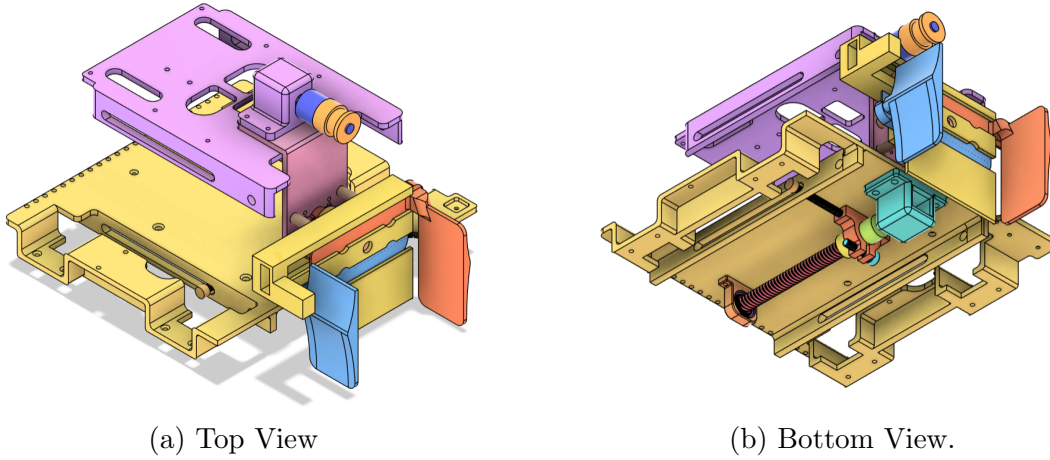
Final Item Collection subsystem CAD assembly, isometric views.
